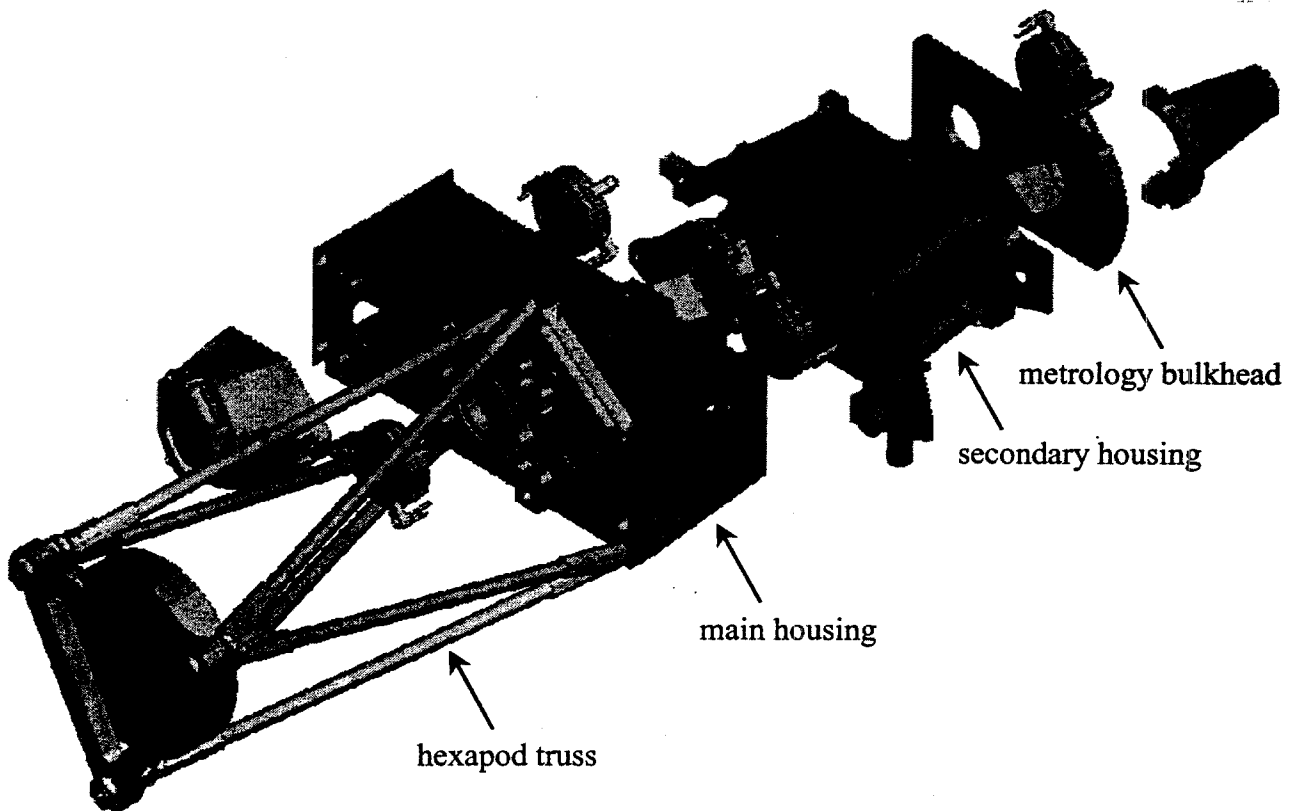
Exploded view of the beam combiner showing mechanical interfaces.
